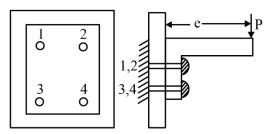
Eccentric load perpendicular to axis of the bolts
